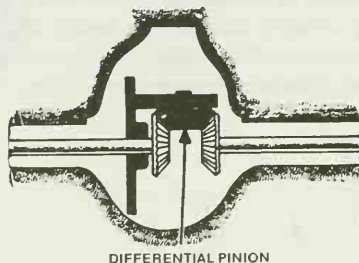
A small pinion gear meshes with the two side gears. (GMC Truck and Coach Division of General Motors Corporation)
